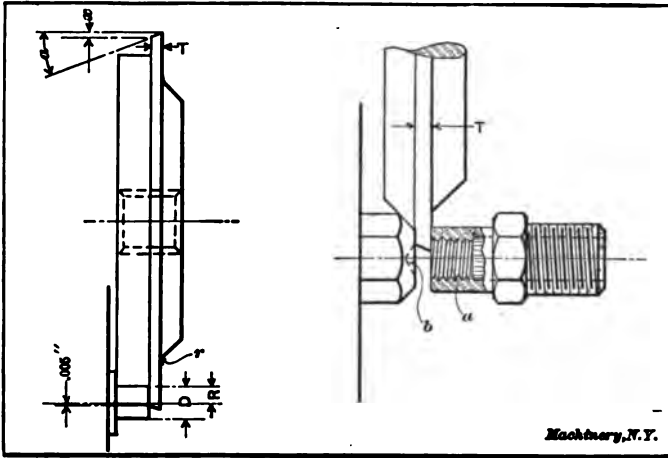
Diagram showing Dimensions of Circular Cut-off Tool when it is used both for cutting-off and forming part of the Work
